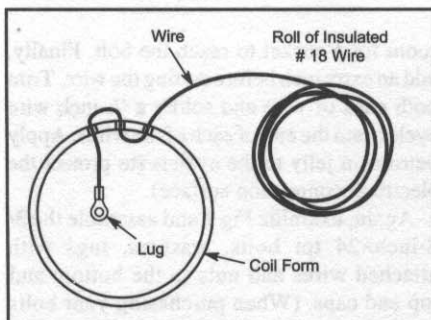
Cross-sectional view of loading-coil form, showing installation of wire through three small holes at each end of the form.
